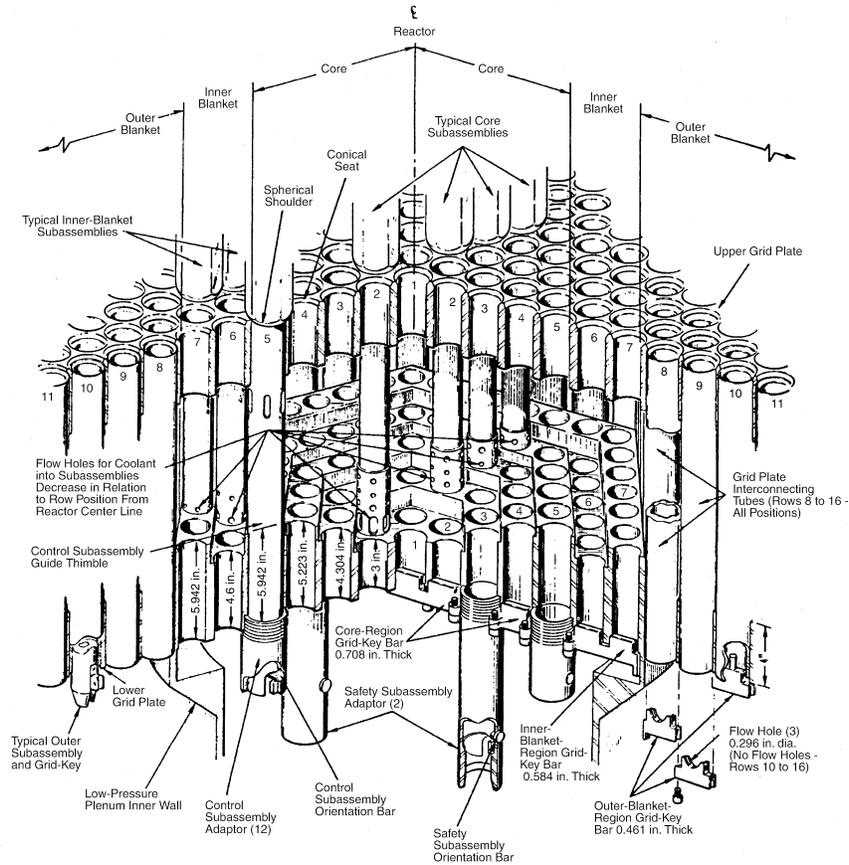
DETAILS OF GRID-PLENUM ASSEMBLY.
